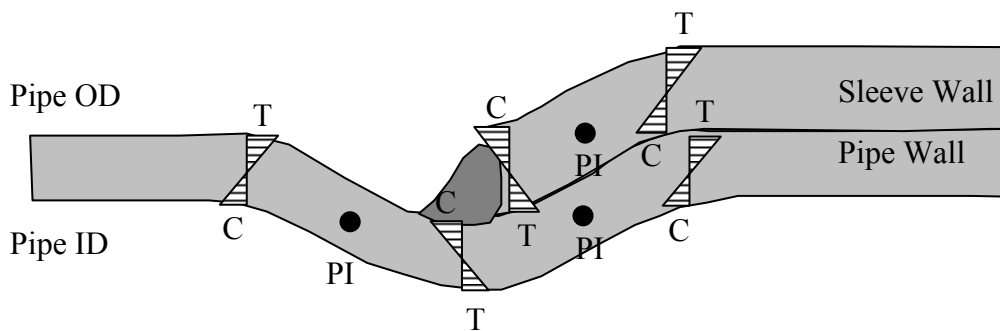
Sketch of Active Gauges during Completion of Sleeve Welding
